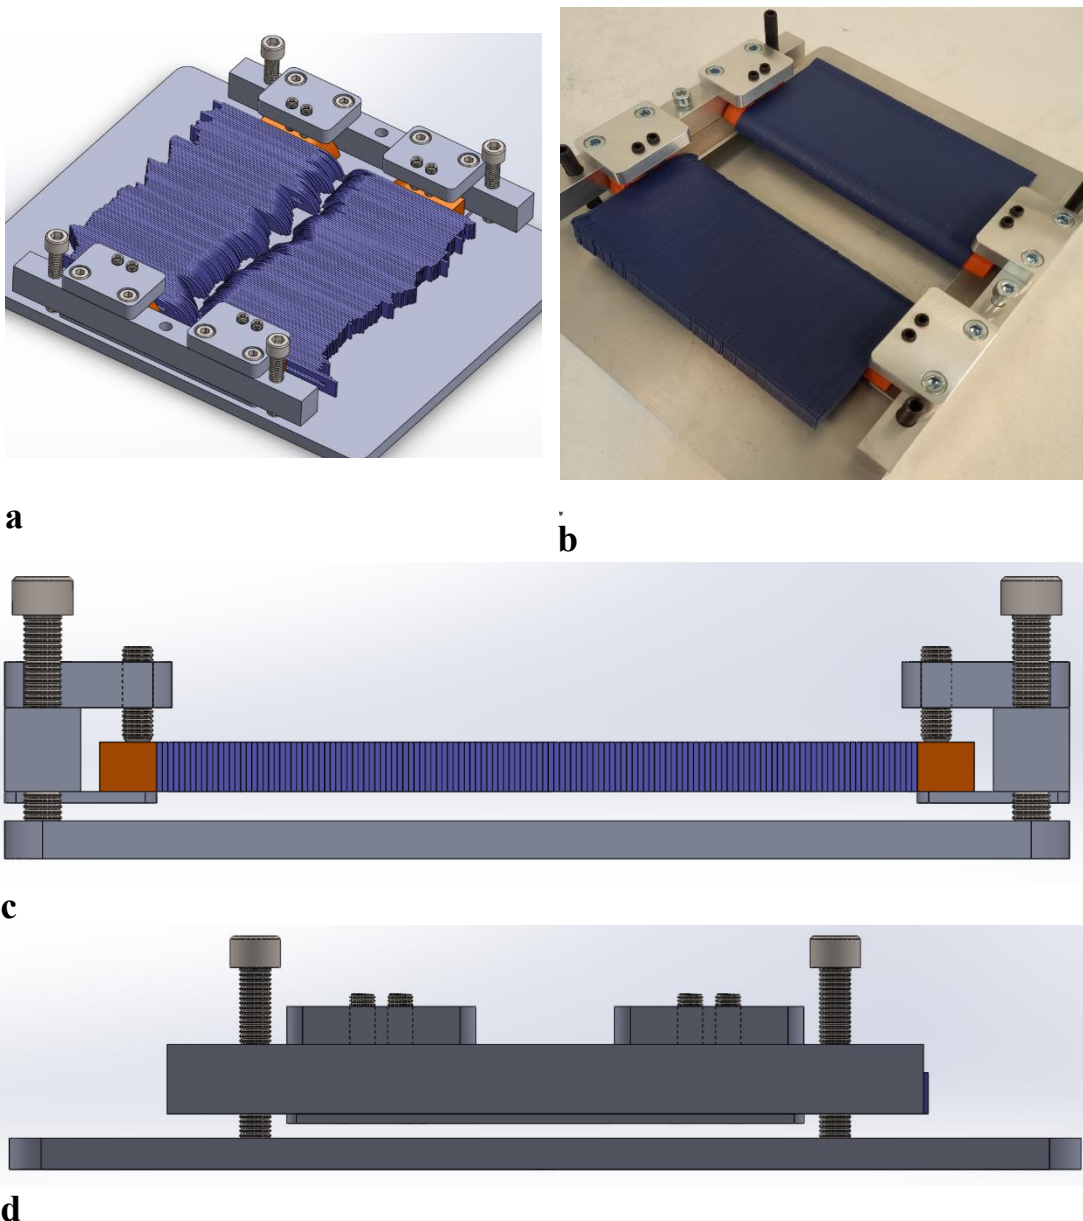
Photo and 3D CAD (SolidWorks™) drawings of the multi-material deposition apparatus; (a) CAD isometric view; (b) Photo of the manufactured apparatus; (c) Left side view; (d) Front view.
